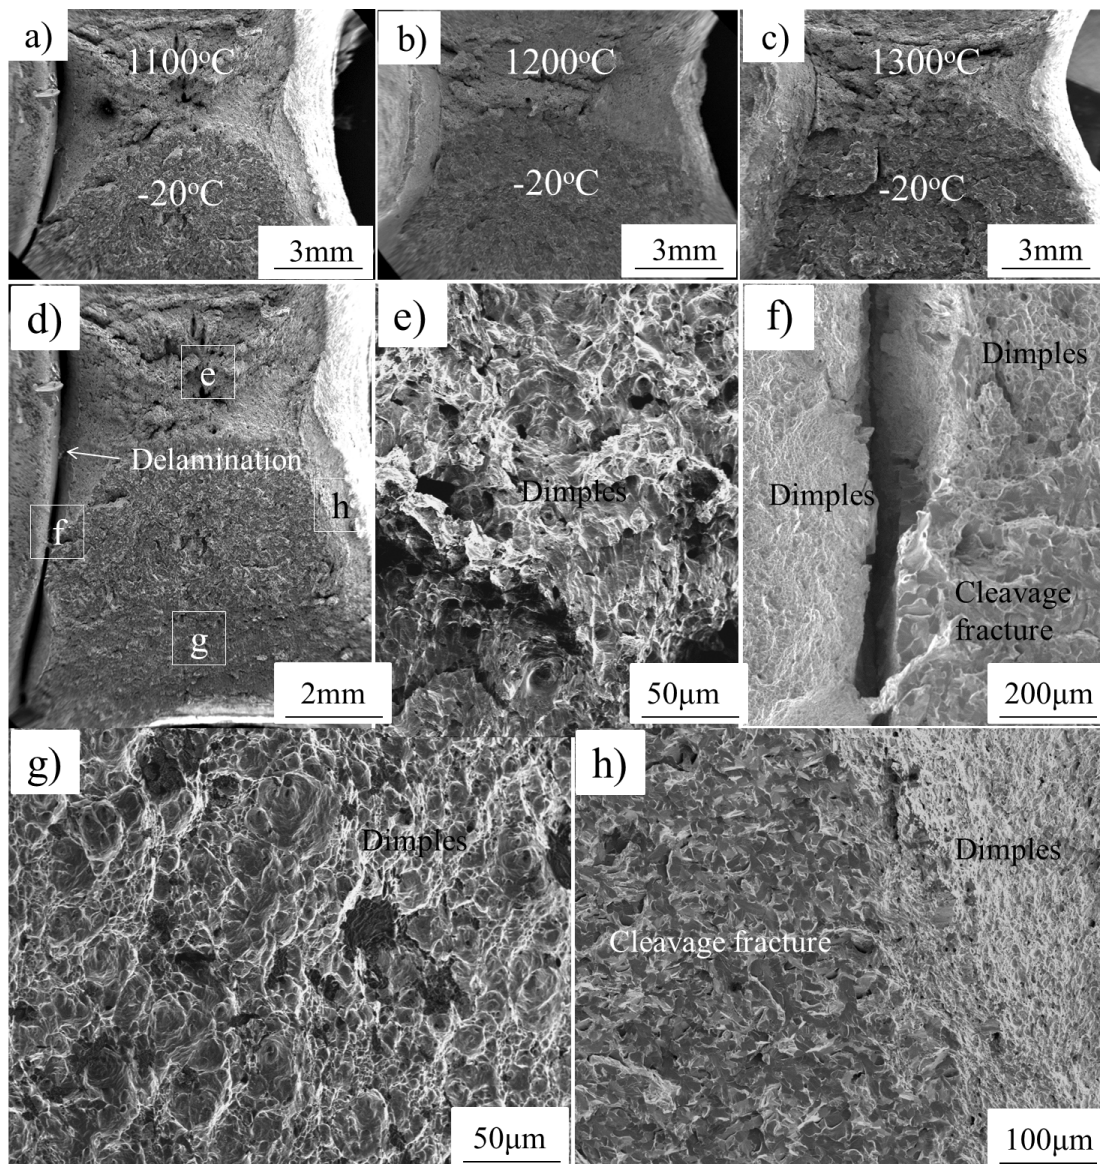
The impact fracture morphologies of stainless steel clad plates with different rolling temperatures under I: a) 1100°C; b) 1200°C; c) 1300°C; the macroscopic impact fracture characteristics of stainless steel clad plates fabricated at 1100°C under mode I: d) macro picture; e) fibrous zone; f) interface; g) compression stress zone; h) interface between radiation zone and shear lip
